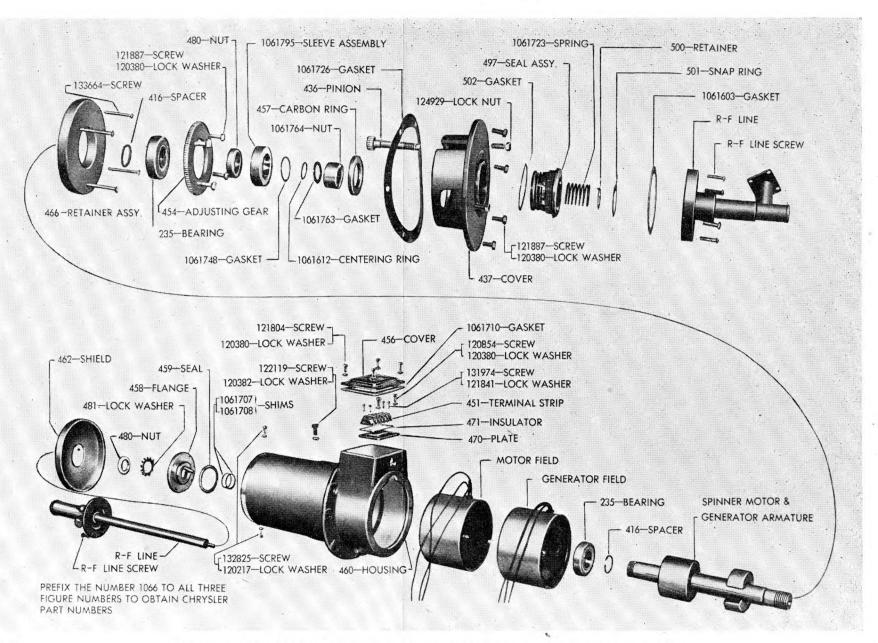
Exploded view of reference generator and spinner motor assembly
